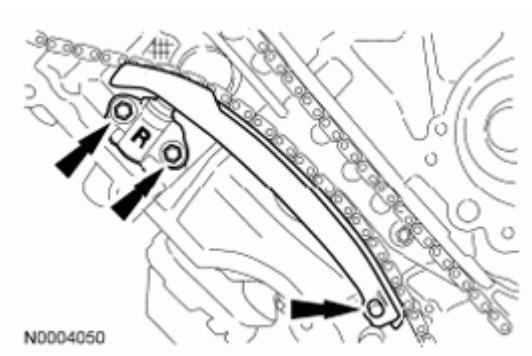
Locating Timing Chain Tensioner And Mounting Bolts
